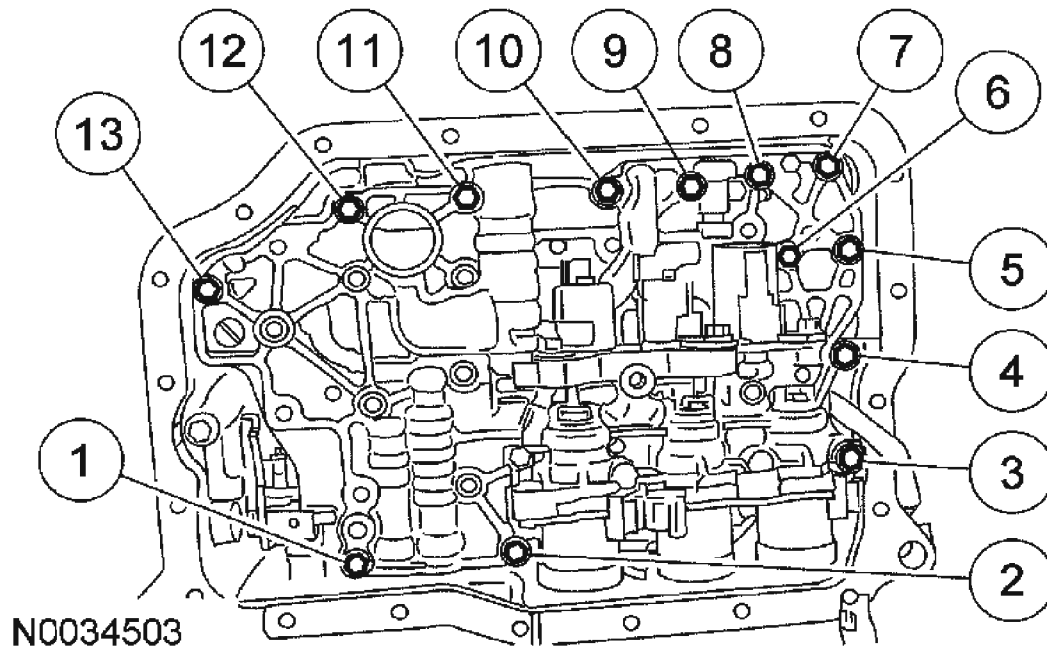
Tightening Main Control Valve Body Retaining Bolts
